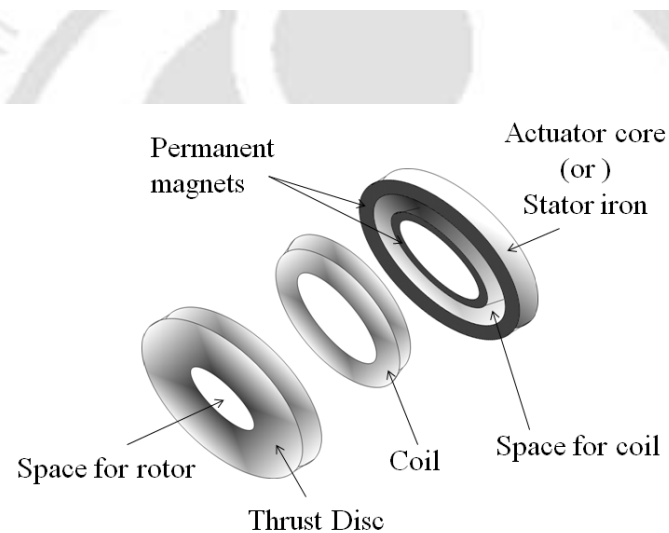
Parts of actuator of a hybrid magnetic thrust bearing
